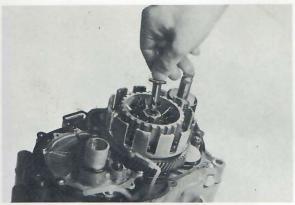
Removing clutch release rod and clutch pressure plates
